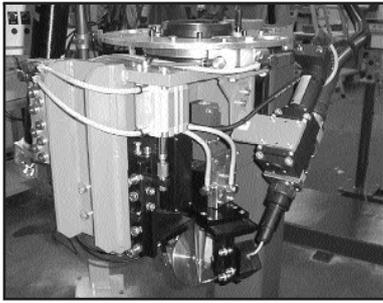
Robot with cutting and welding tool (source: Volvo)
